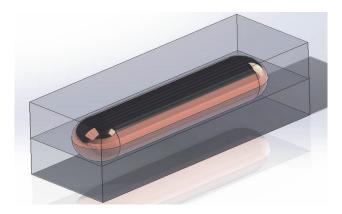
48-Bundle Used Fuel Container Buffer Box
